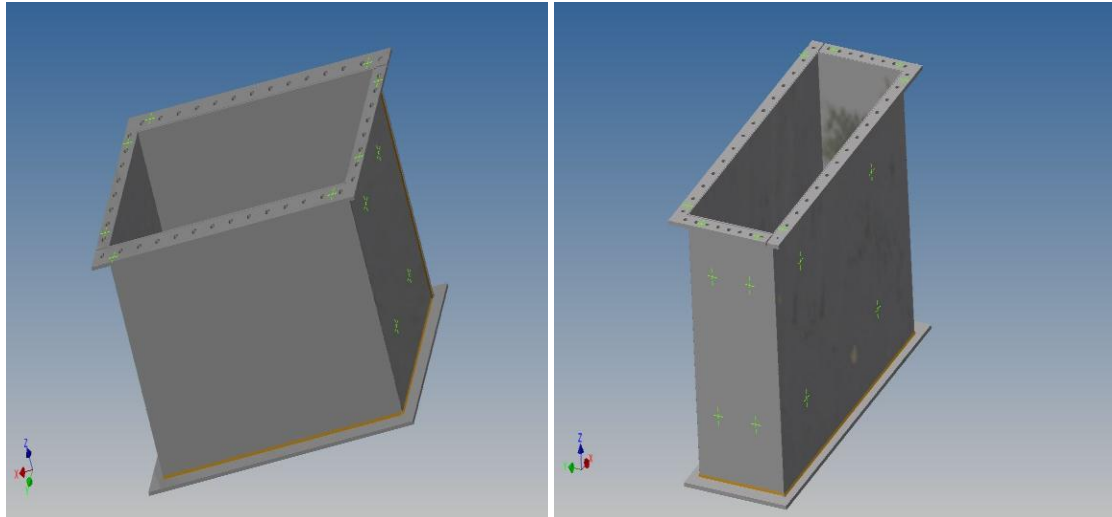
Geometry of the workpiece to be welding and all the touch point
